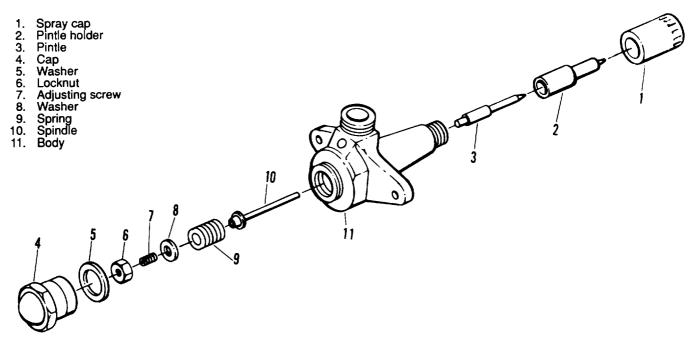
Fuel Injection Nozzle Holder, Exploded View
